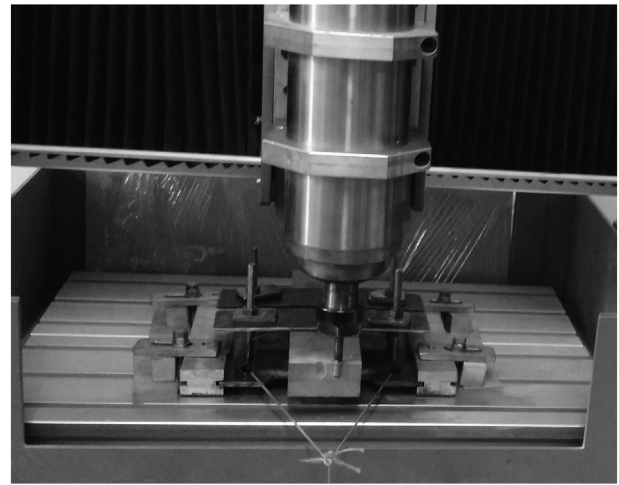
Dressing device for the brazed diamond micro-powder bur.
